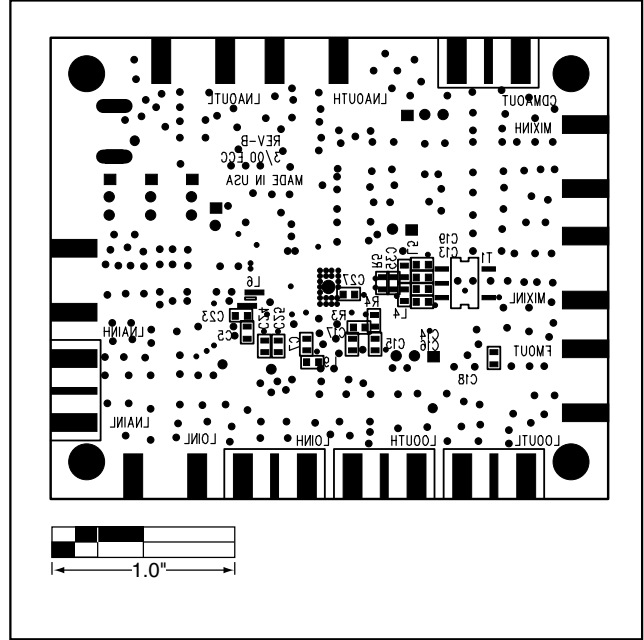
MAX2320/21/22/24/26/27 EV Kits Component Placement Guide—Solder Side
